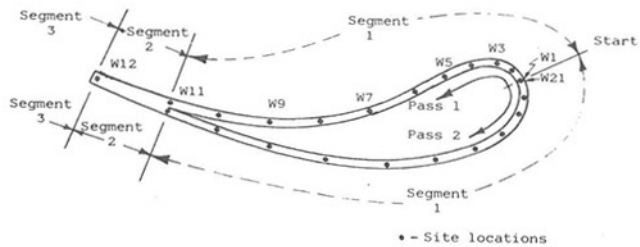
Sketch showing the location of sites and welding segments used for squealer tip repair of a CF6-50 HP blade
